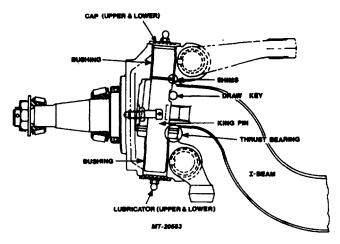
Steering Knuckle with Thrust Bearing - Bolted on Cap - Lubricator in Each Cap.
